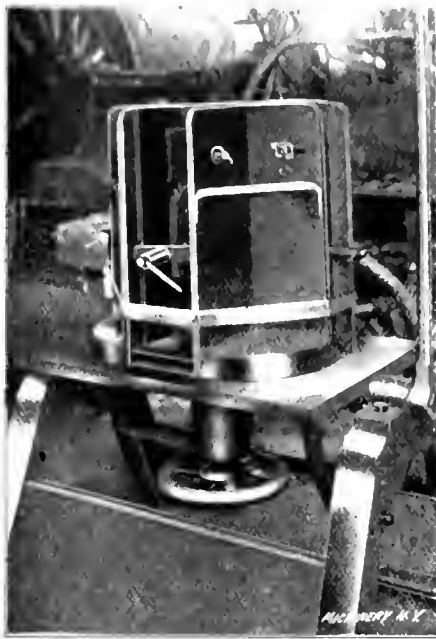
Mold ready for Babbitting a Four-bar Guide Cross-head
